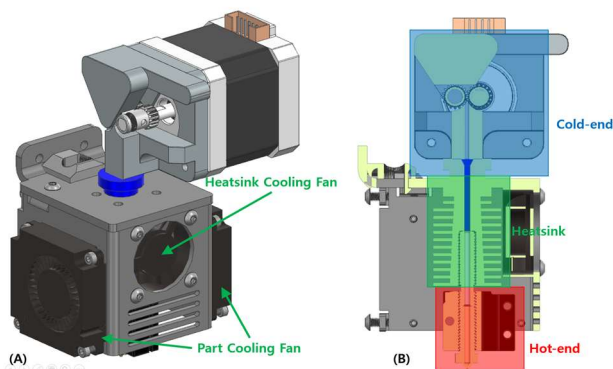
(A) Extrusion and Thermal System, (B) Section View
